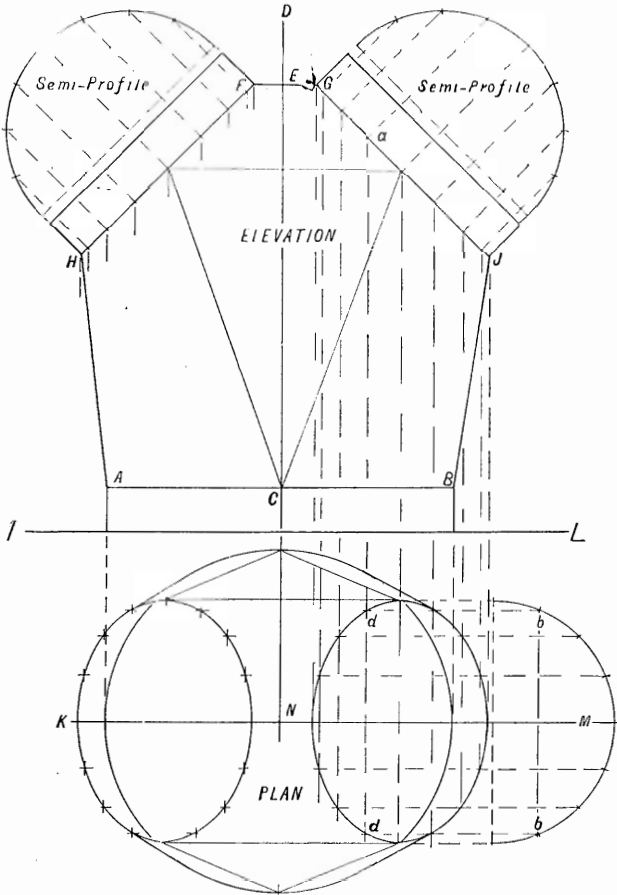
The Branched Fitting Represented in Plan and Elevation.
